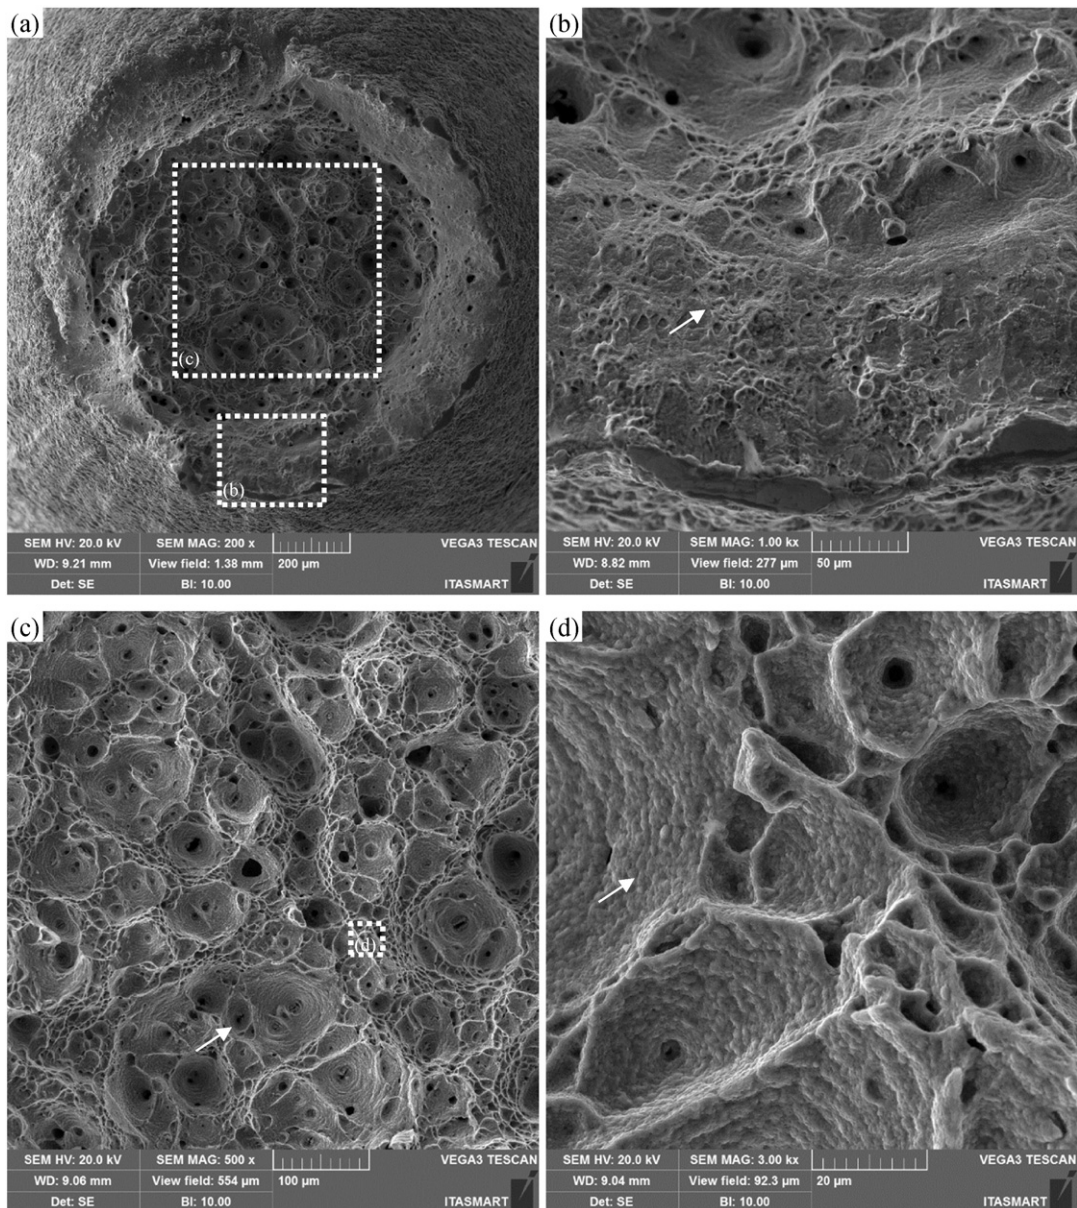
SEM micrographs of maraging 300 crept at 650 °C and 500 MPa showing fracture surfaces: (a) typical cup-and-cone, (b) 45° shear lips with C-shaped dimples, (c) equiaxed dimples and (d) slip lines.
